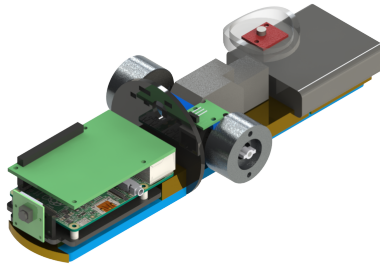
Mounting plate with gearbox, ballast, electronics, sensors, bulkhead, and battery
